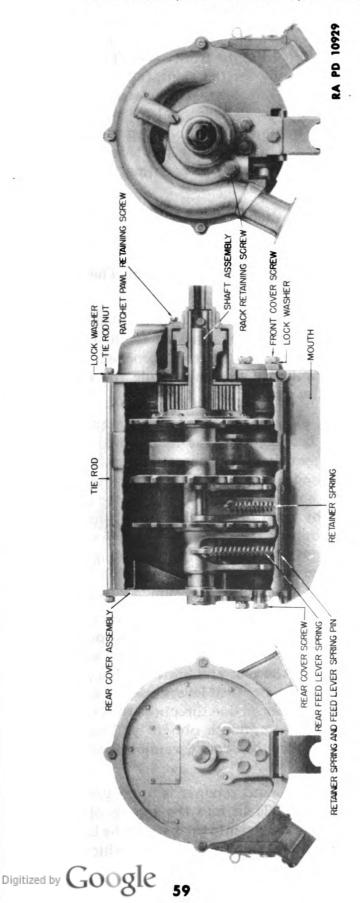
20-MM Feed Mechanism AN-M1 – Sectioned View
